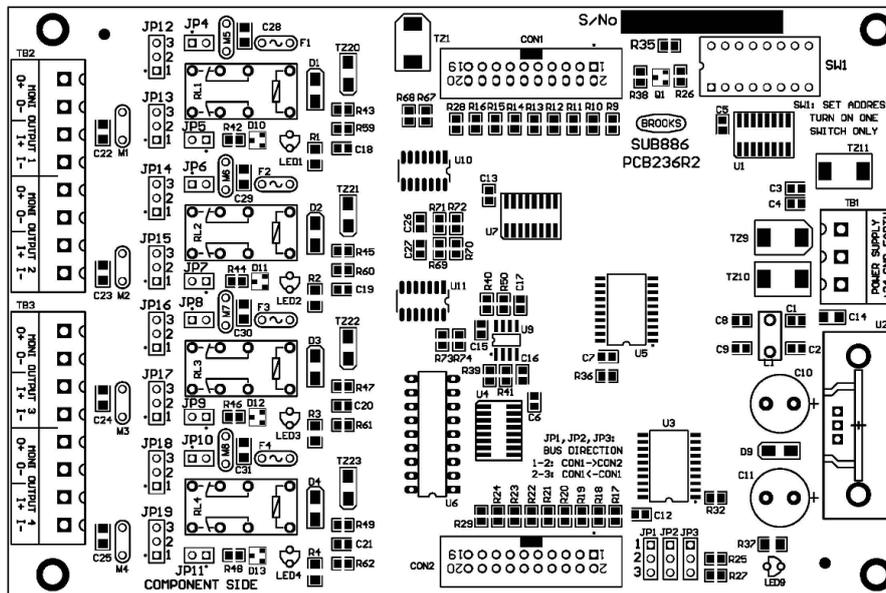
Supervised Output Expansion Board Layout (SUB886)
